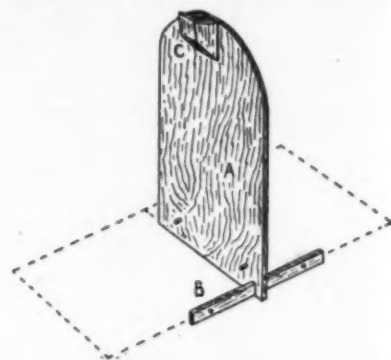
The constructive details of Pigeon's prism stereoscope.
